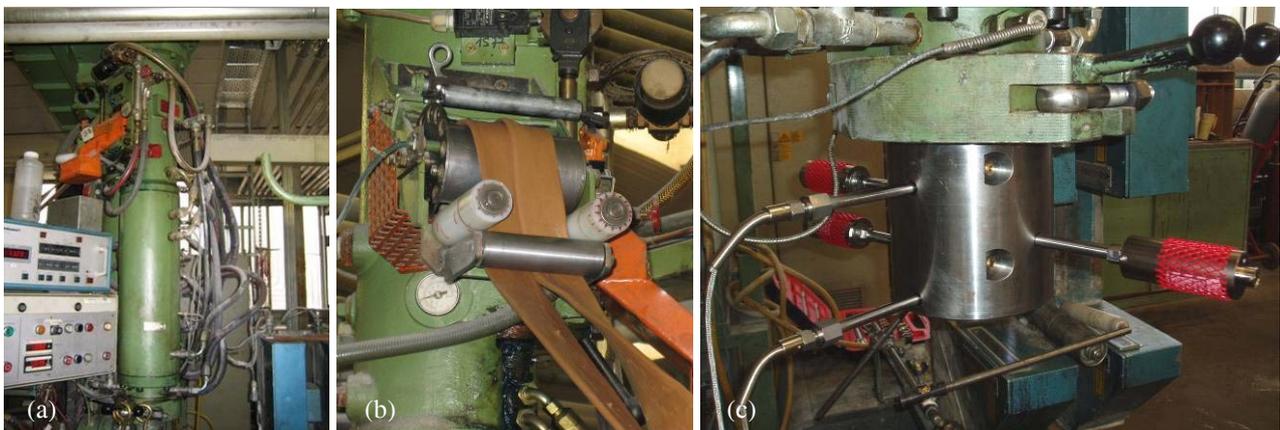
Extrusion rheometer: (a) vertical extruder, (b) band supply, (c) extrusion tool with pressure transducers.
